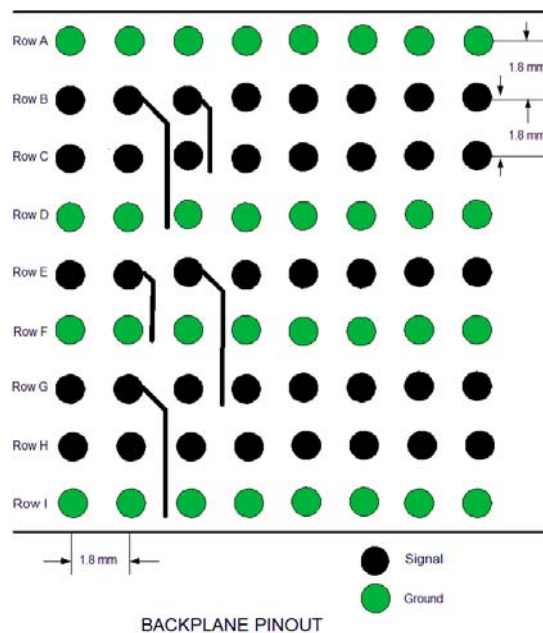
VIPER Backplane Hole Pattern – Single-Ended
